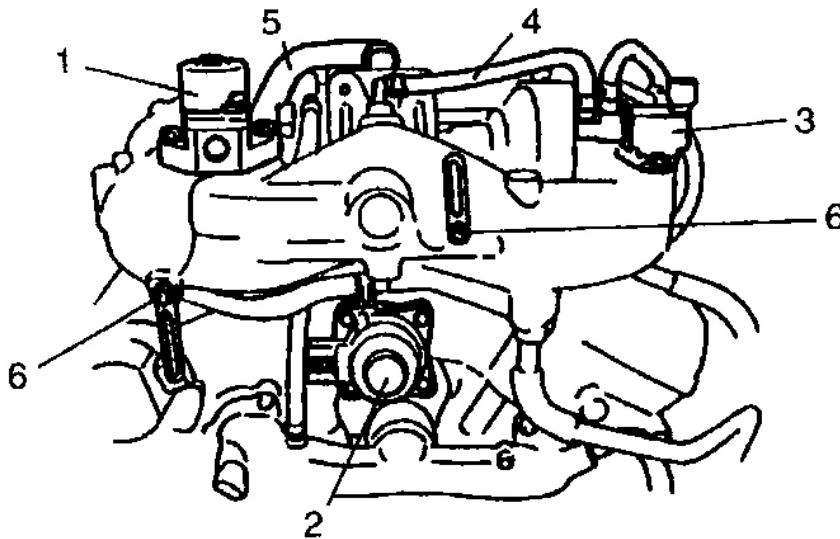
Installing Throttle Body To Intake Collector With Throttle Body Gasket
